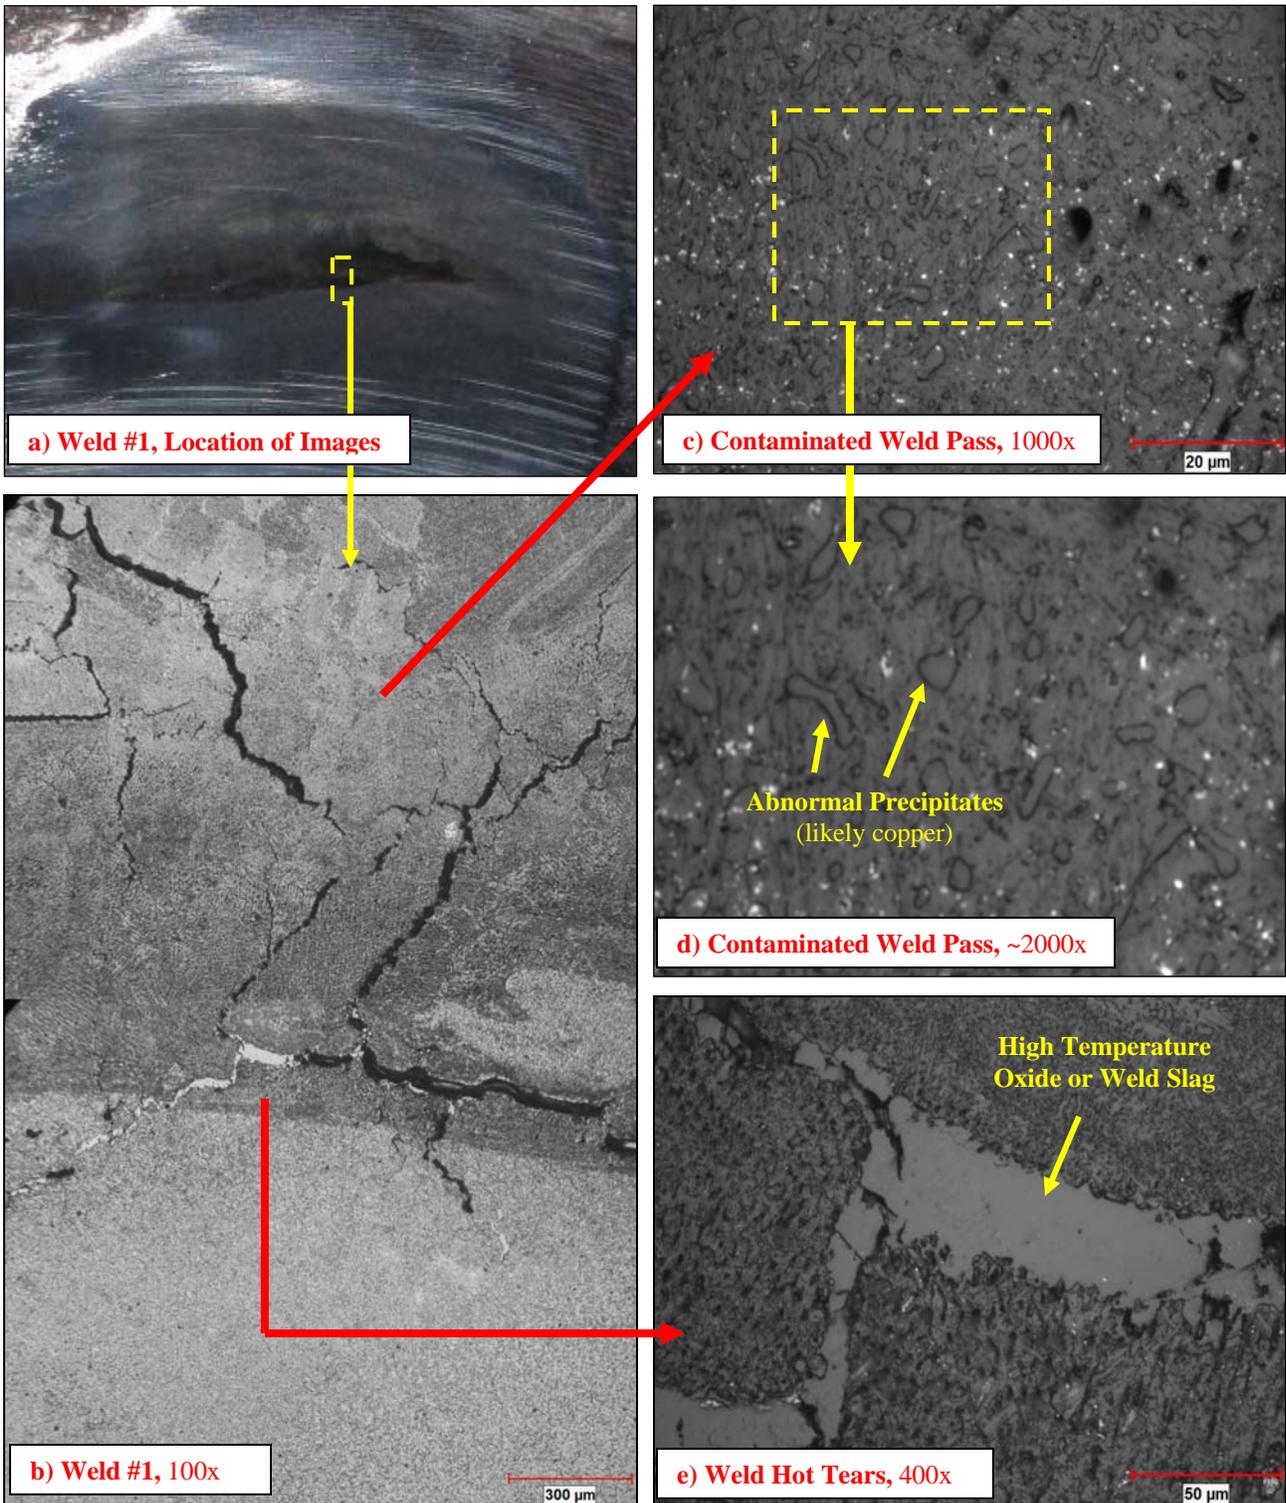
Micrographs taken from replicas of Weld #1. (b) Numerous hot tear cracks were observed throughout the contaminated portion of the weld. These cracks had formed during welding at initial construction. (c,d) The cracked portion of the weld exhibited an abnormal microstructure comprising of a precipitated phase, likely copper. (e) Oxides or weld slag were present within the weld, formed while hot from welding. Images taken from replications, etched on-site using 3% nital.
